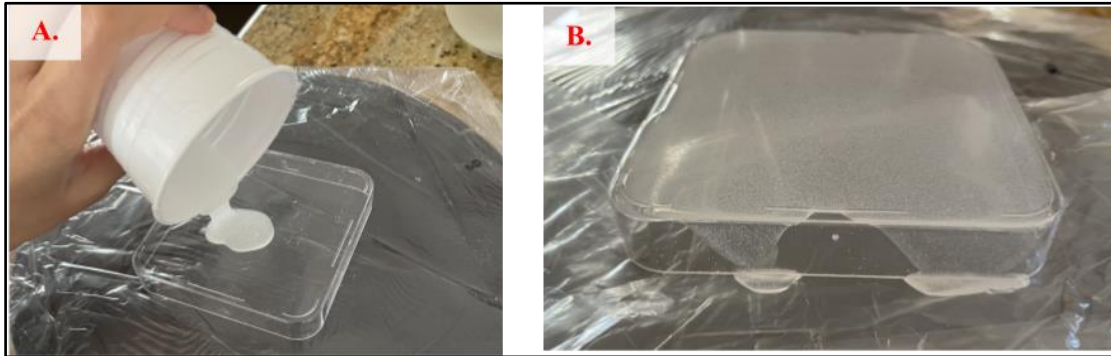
Creating the silicone molds. (A) Pour silicone mixture onto the petri dish, top-side down. (B) Spin turn-table rapidly for 5 minutes or until excess silicone has dripped off edges.
